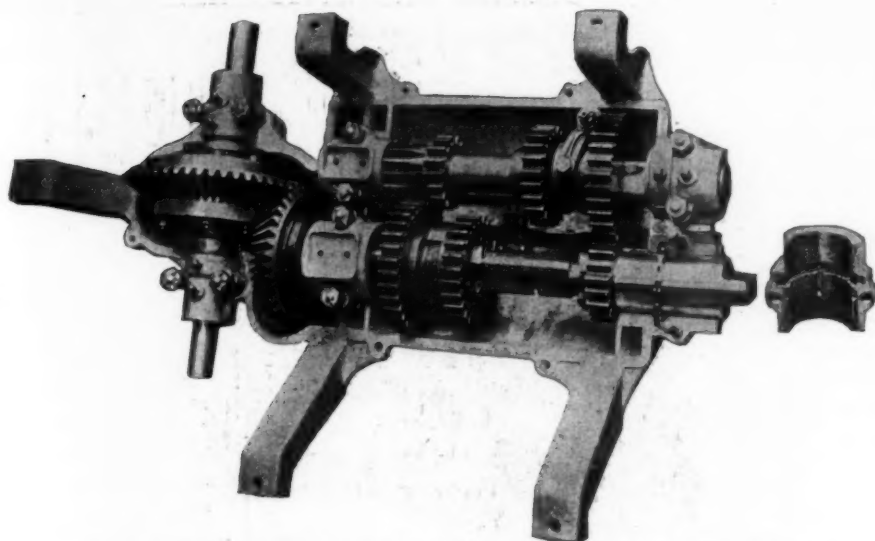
CHANGE-SPEED GEARING AND BEVEL DRIVE TO COUNTERSHAFT.
